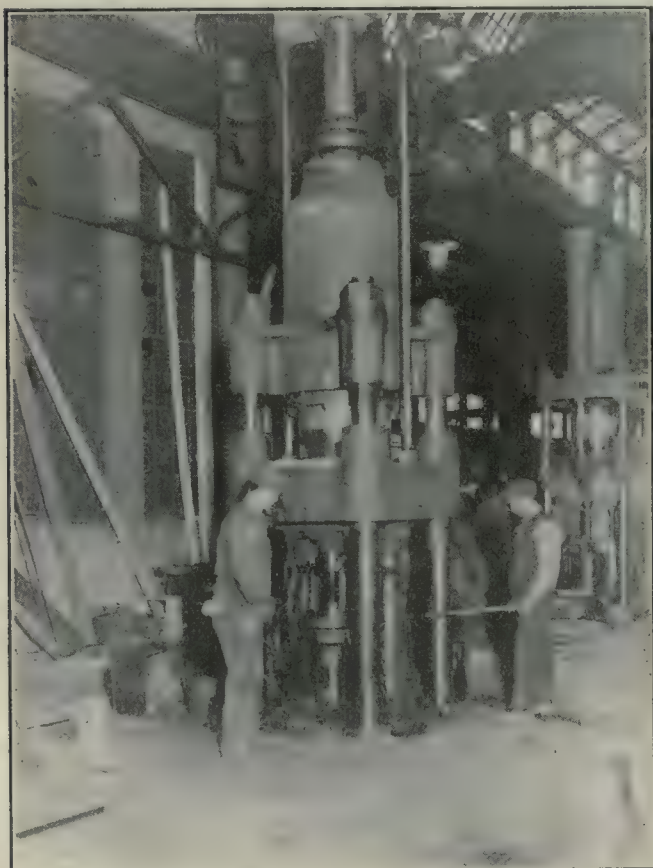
TON R. D. WOOD HYDRAULIC PRESS PERFORMING FIRST OPERATION ON 18-POUNDER SHELL FORGINGS.
